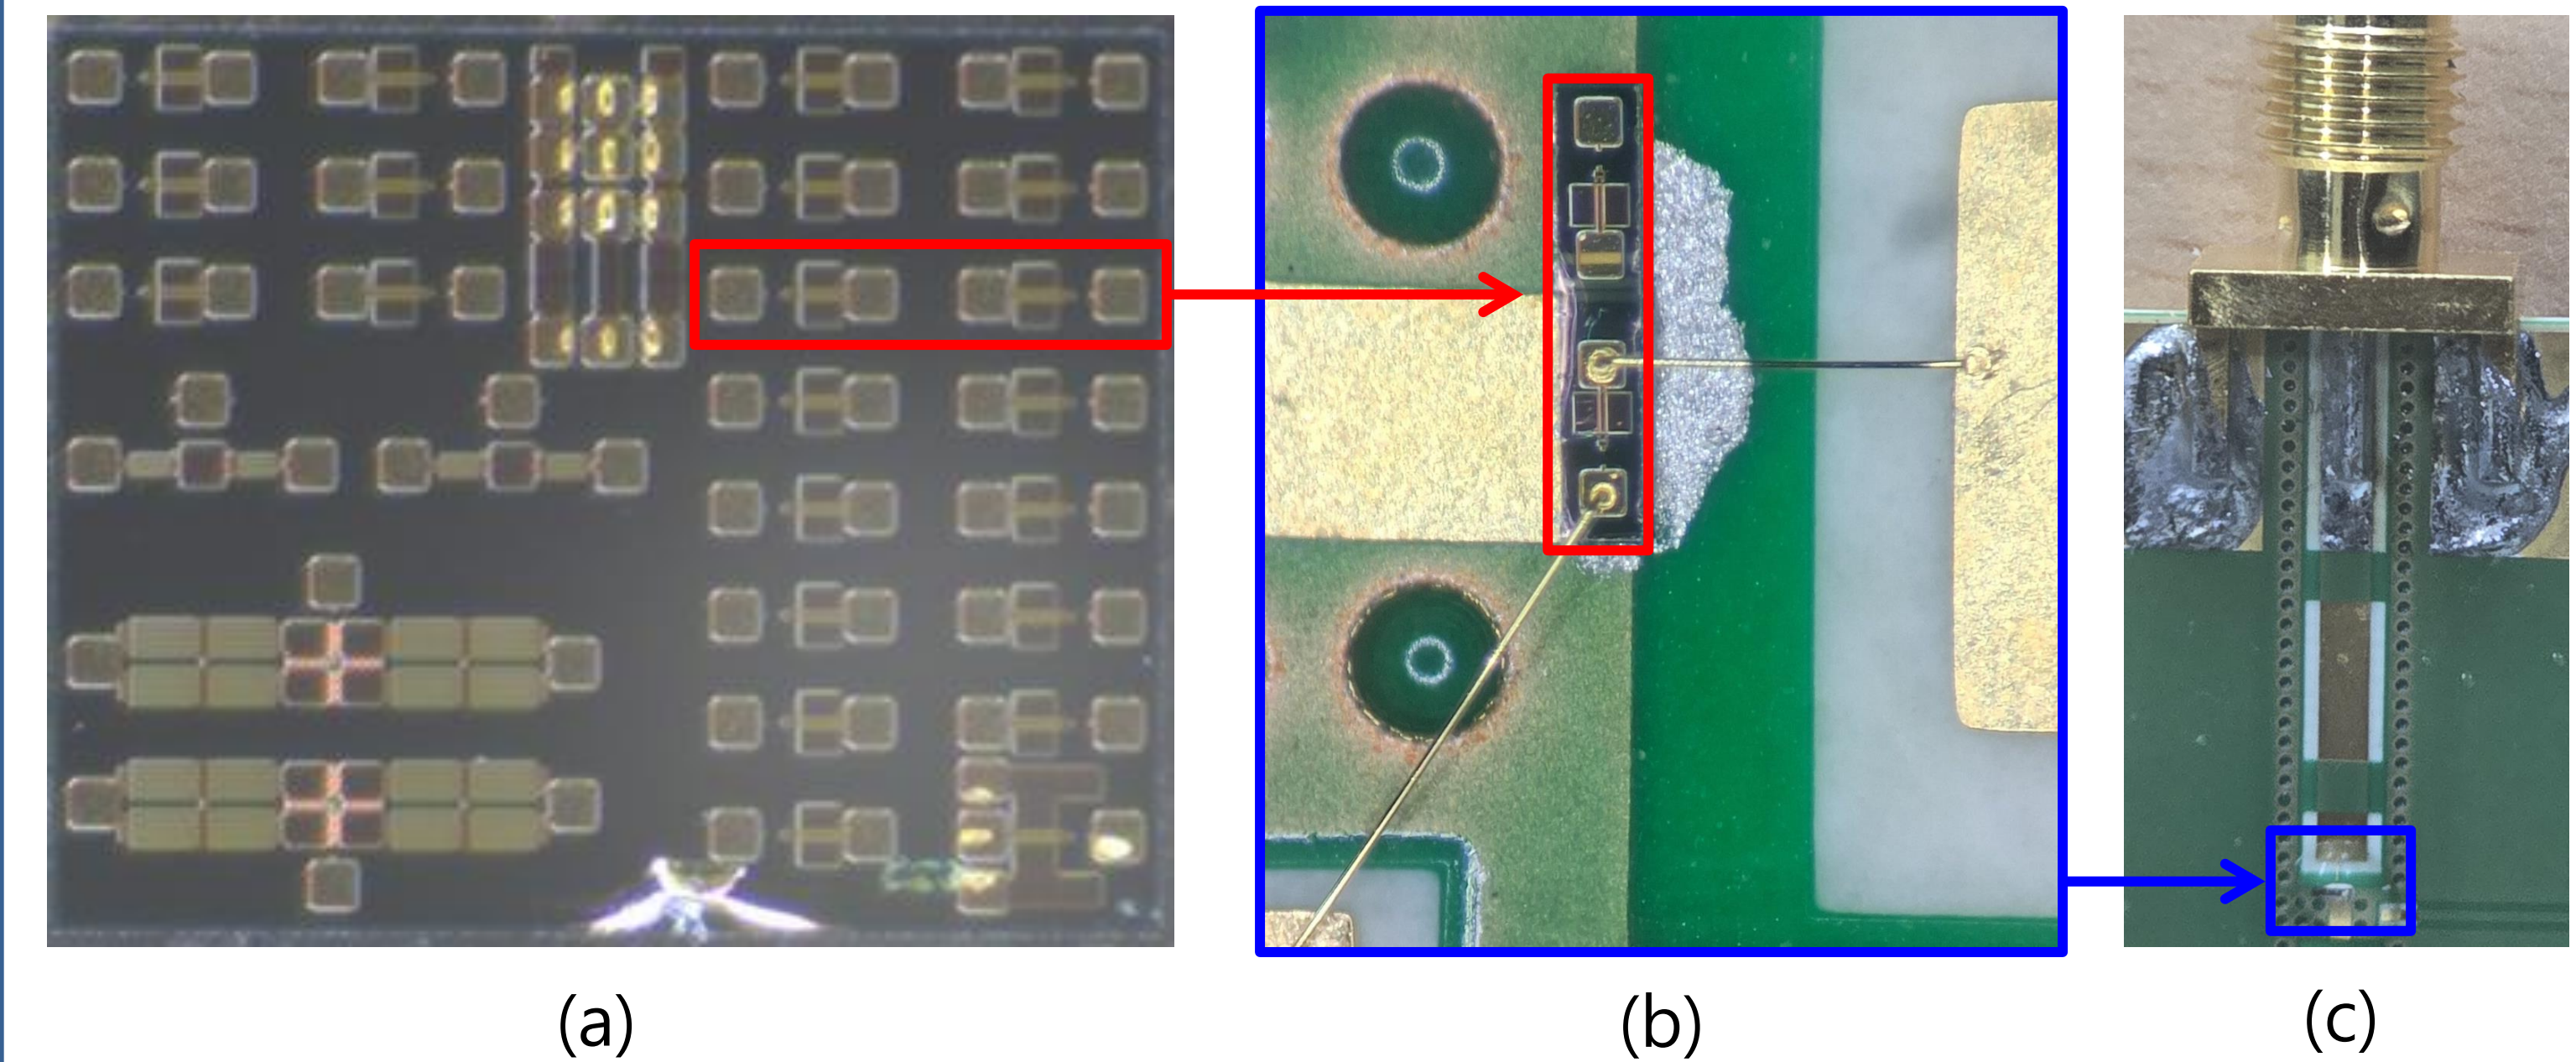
Photograph of (a) die (b) after sawing/wire-bonding (c) chip on board
